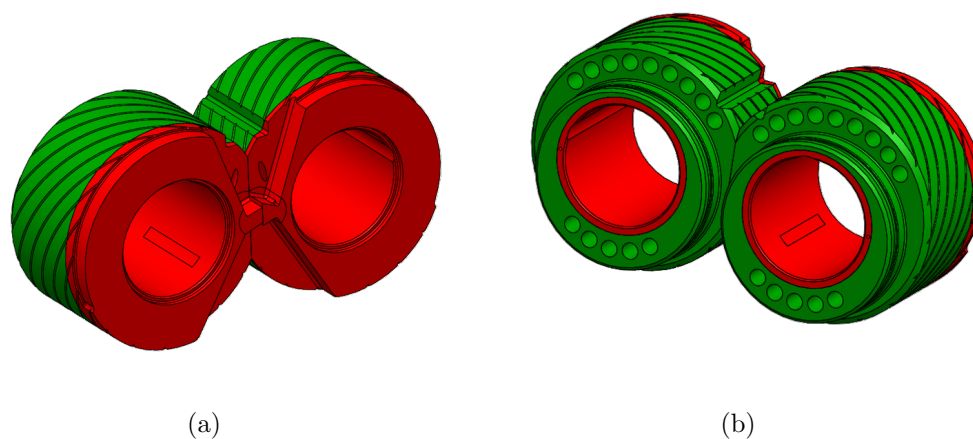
Figure highlighting the distinct materials present in the floating bearing (a) Side of the floating bearing facing the gears (b) Side of the floating bearings facing away from the gears.
